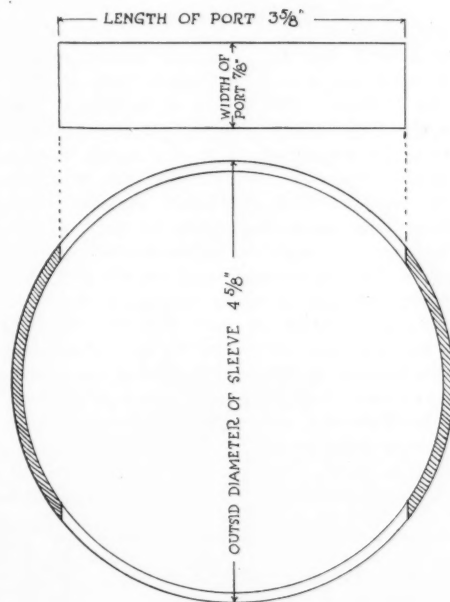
Dimensions of parts in Willys-Knight sleeve-valve engine
